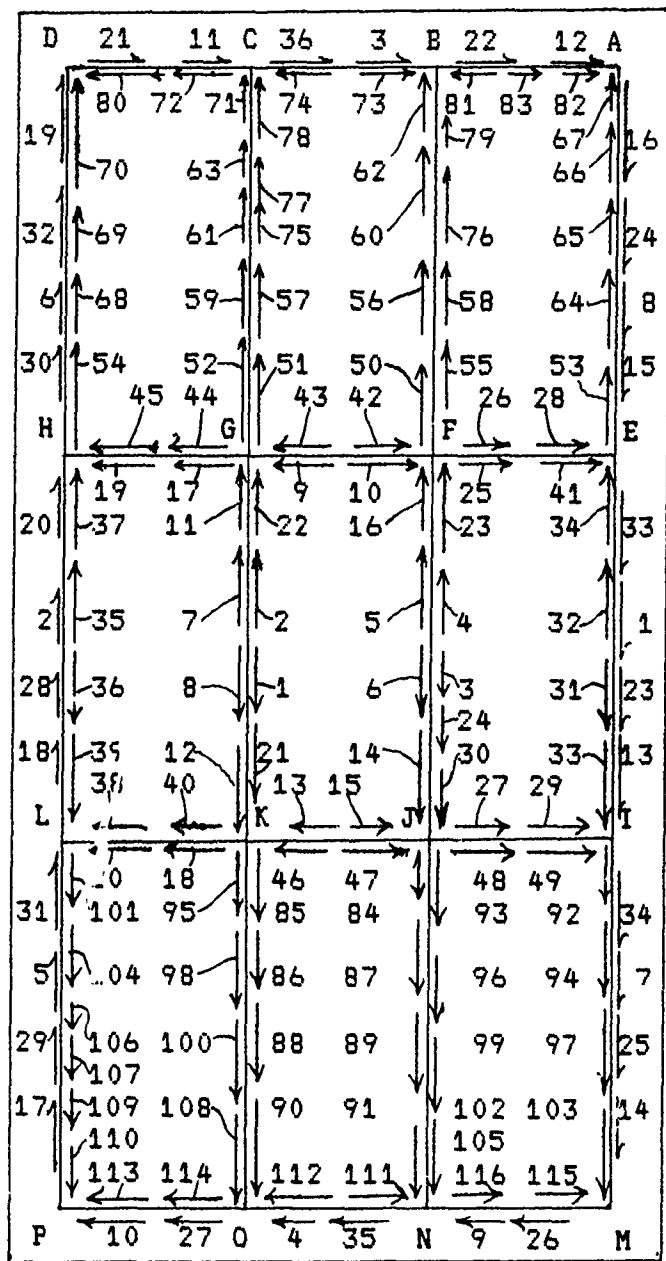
WELDING SEQUENCE USED TO WELD 1/8" "T" STIFFENER ASSEMBLY TO 1/8" PLATE
